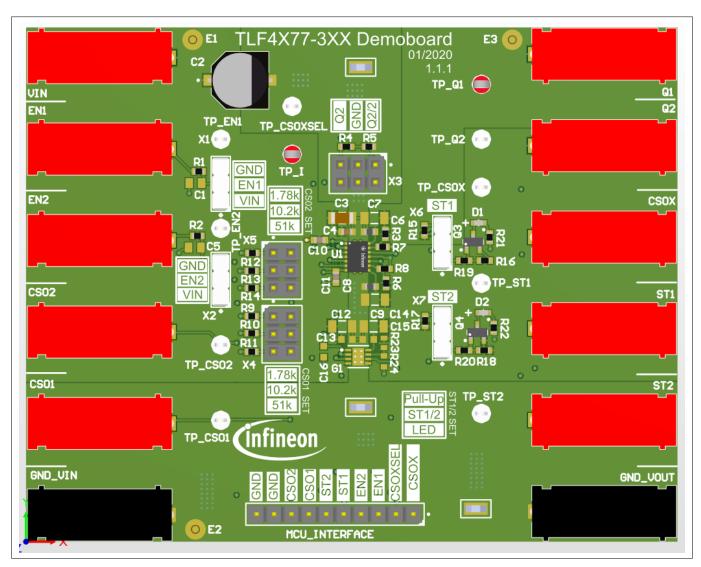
Assembly of TLF4x77-3Lx demoboard for TLF4477-3LA
